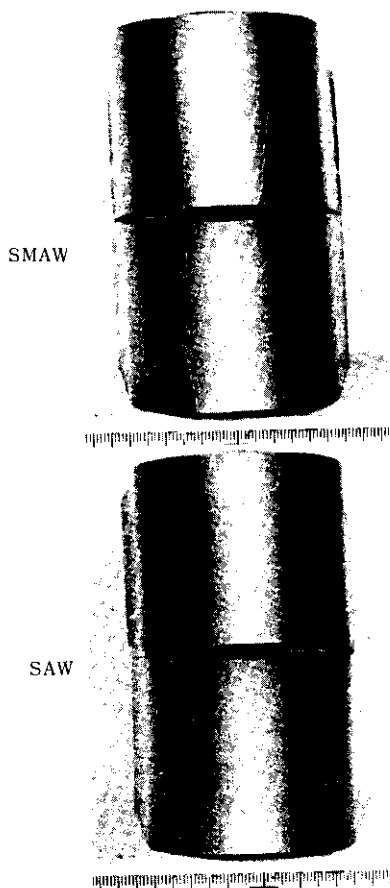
Examples of side bend test results of welded joints (1/4 t)
